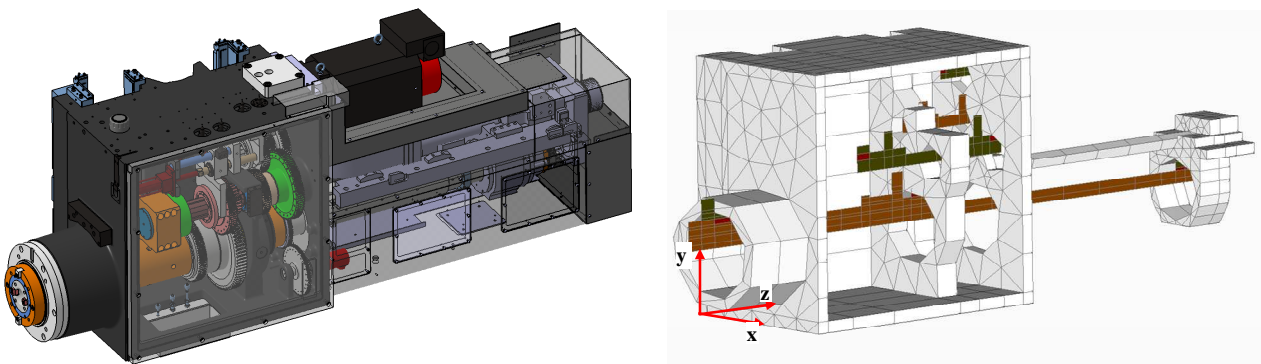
Discrete model based on a headstock simplified geometry: - prismatic elements (body, ball screw, ball nut housing), - cylindrical elements (spindle, bearings, gear wheels, shafts, nut)
